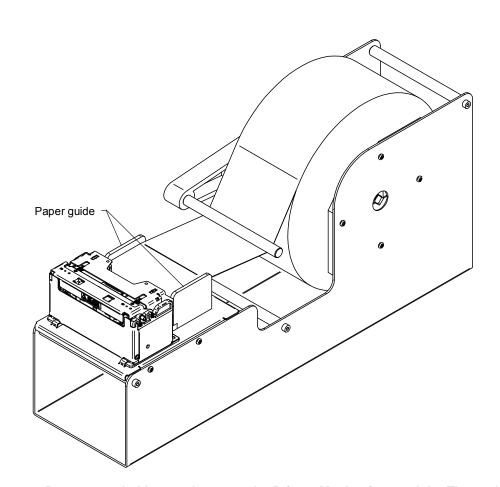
Recommended Layout between the Printer Mechanism and the Thermal Paper (Auto-loading Model)
